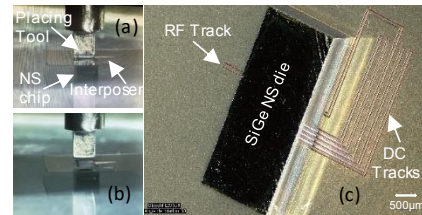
Side camera pictures of the interposer and NS chip during assembly for place position (a) and tool removal (b), and an optical microscope observation of the assembled NS chip on glass interposer (c).
